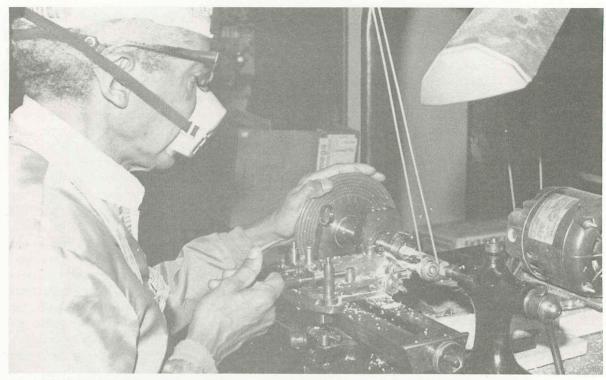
Cutter is fed into workpiece with the handle on the guide screw until checked by the depth screw on the right.
